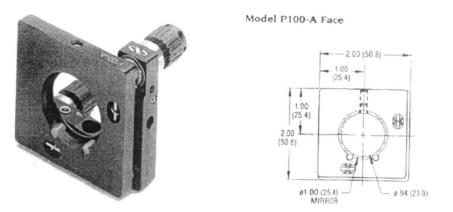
A commercial V-mount for 25.4-mm (1.0-in.) diameter mirrors. (Courtesy of Newport Corporation, Irvine, CA.)
